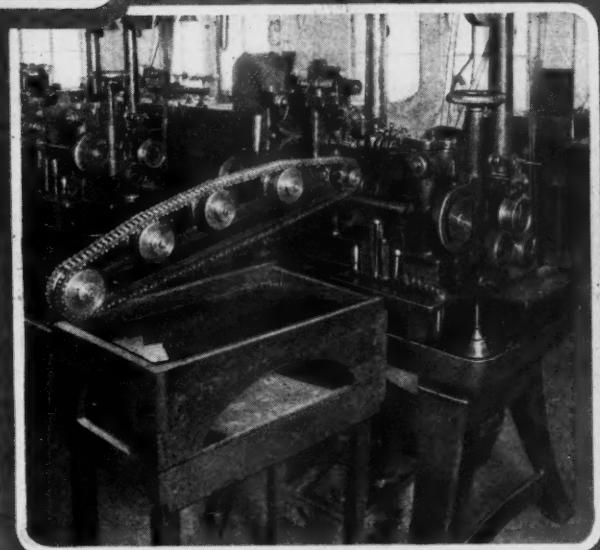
Automatic Machines Produce Many Kinds of Parts by the Thousand
